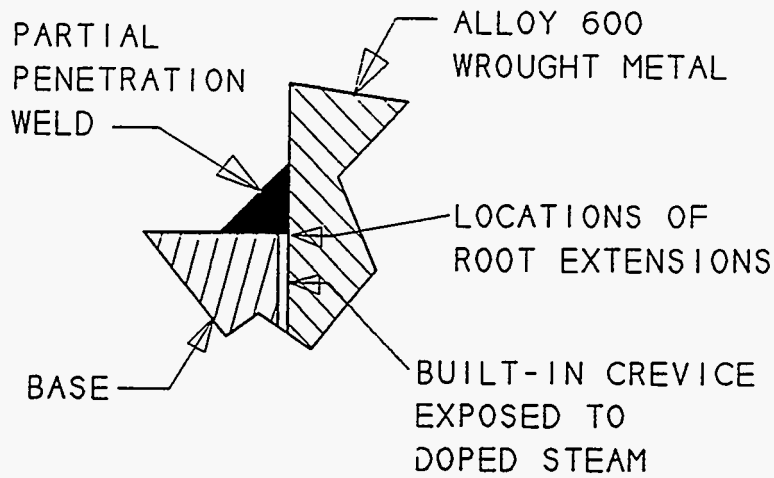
PARTIAL PENETRATION WELD GEOMETRY
